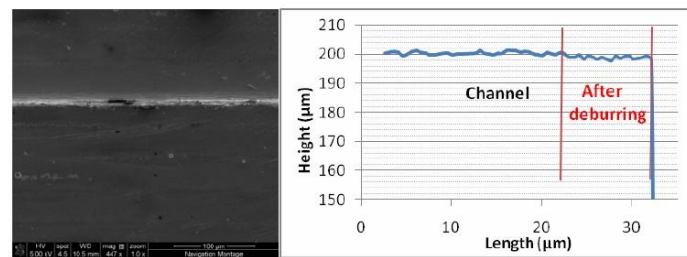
Machined surface topography after micromilling and laser deburring (see online version for colours)
